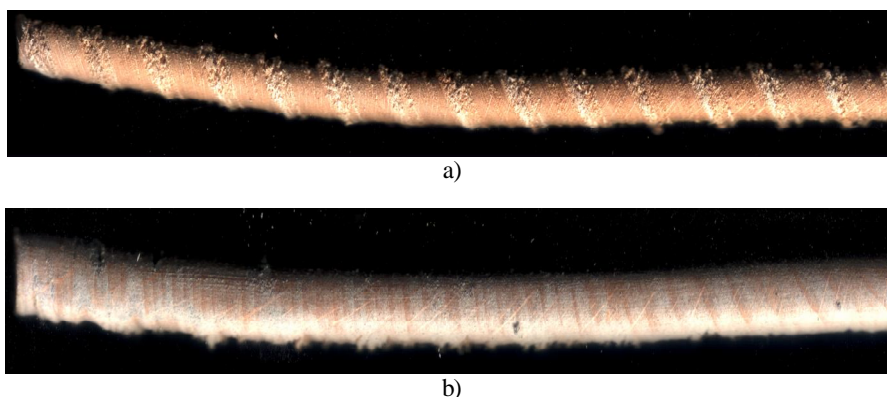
Sample image (Fa36H28, u.a. 26B) a) before the mechanical machining of the sample b) after mechanical machining of the sample
